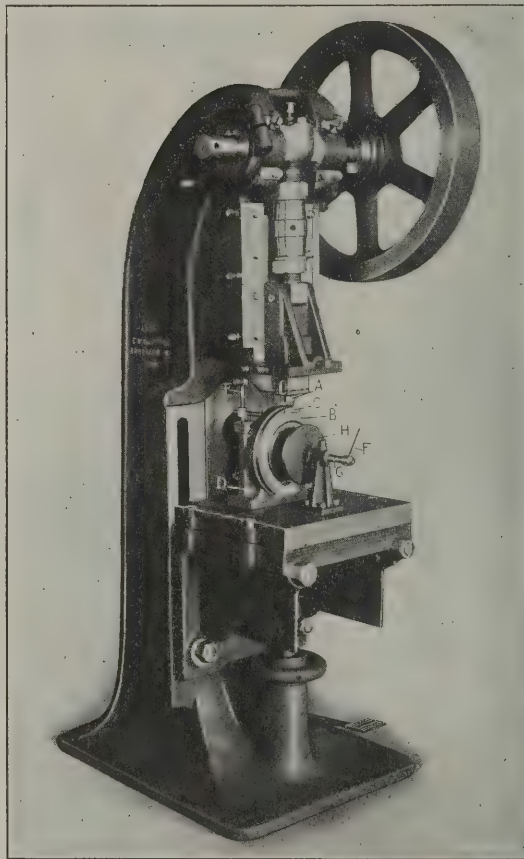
Perforating Attachment with Special Device for Holding Shell in Place
